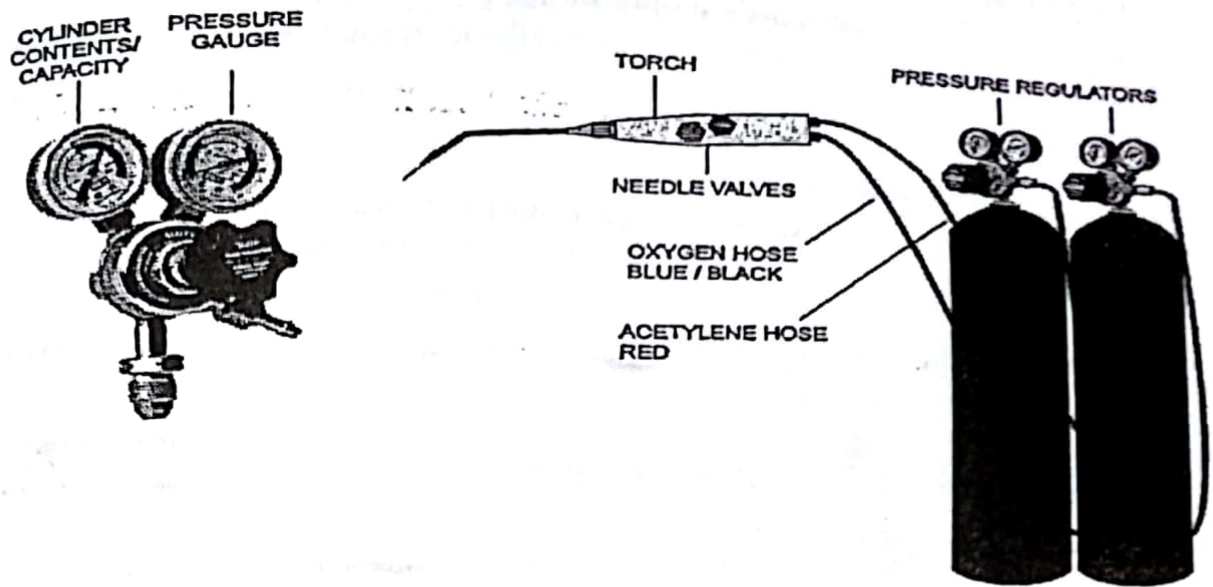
Schematic sketches of oxyacetylene welding torch and gas supply
